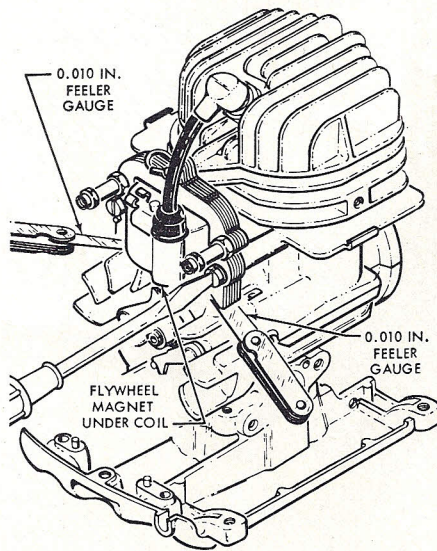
Adjusting air gap on BP-1 chain saw engine magneto. Loosen mounting screws, turn flywheel magnet under coil, insert 0.010 feeler gage under each side of armature and tighten mounting screws.
